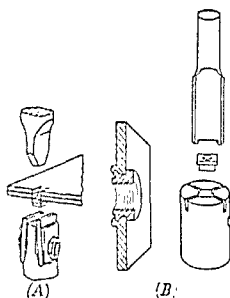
Commercial assembling dies: (A) Metalace type (Crockett Engineering Co.); (B) clinch-nut type (Richard Brothers Division, Allied Products Corp.).
